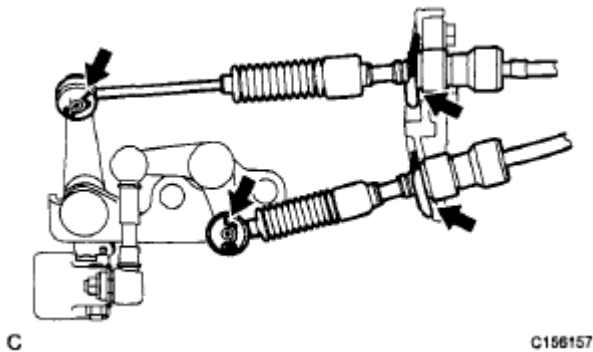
Locating Transmission Control Cable Assembly Bolts
